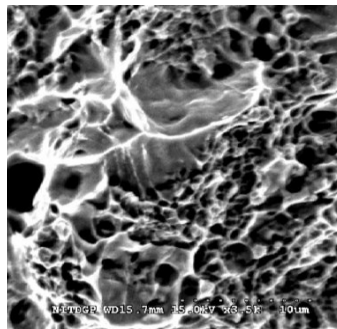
Fractured surfaces of the tensile tested specimens: (c) 3-cycle
